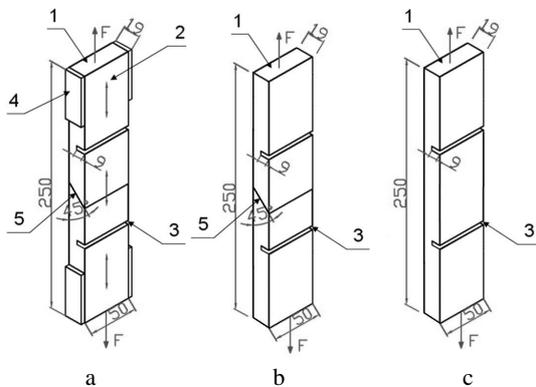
Tensile specimen and loading scheme: a – veneered specimen (miter bond), b – uncoated specimen (miter bond), c – uncoated specimen (solid): 1 – particleboard, 2 – wood veneer, 3 – cuts (half of specimen thickness), 4 – plywood, 5 – PVA glue line, F – load direction
